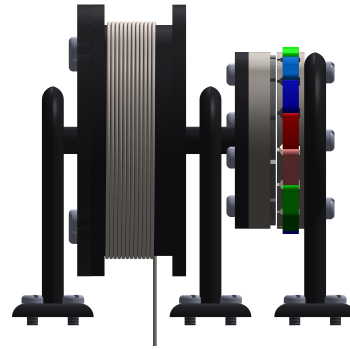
Side-view of the spool, axial flux generator, and support structure. This view shows the relative placement of the spool, generator rotor and stator, and the support frames that are primarily for structural stability.
